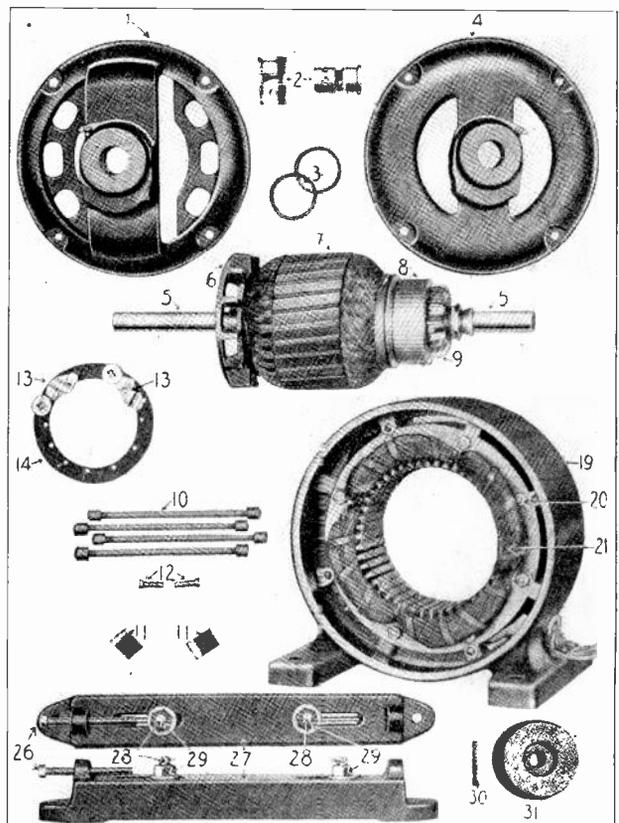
Disassembled view showing important parts of an A. C. single-phase repulsion motor.
